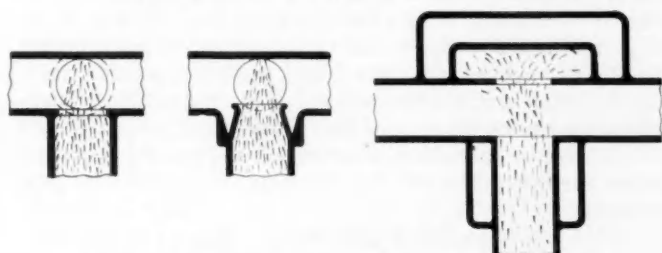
SOME FORMS OF RISER CONSTRUCTION
